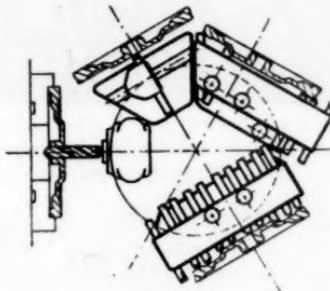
Interchangeable tool blocks on multi-cutting lathe.
